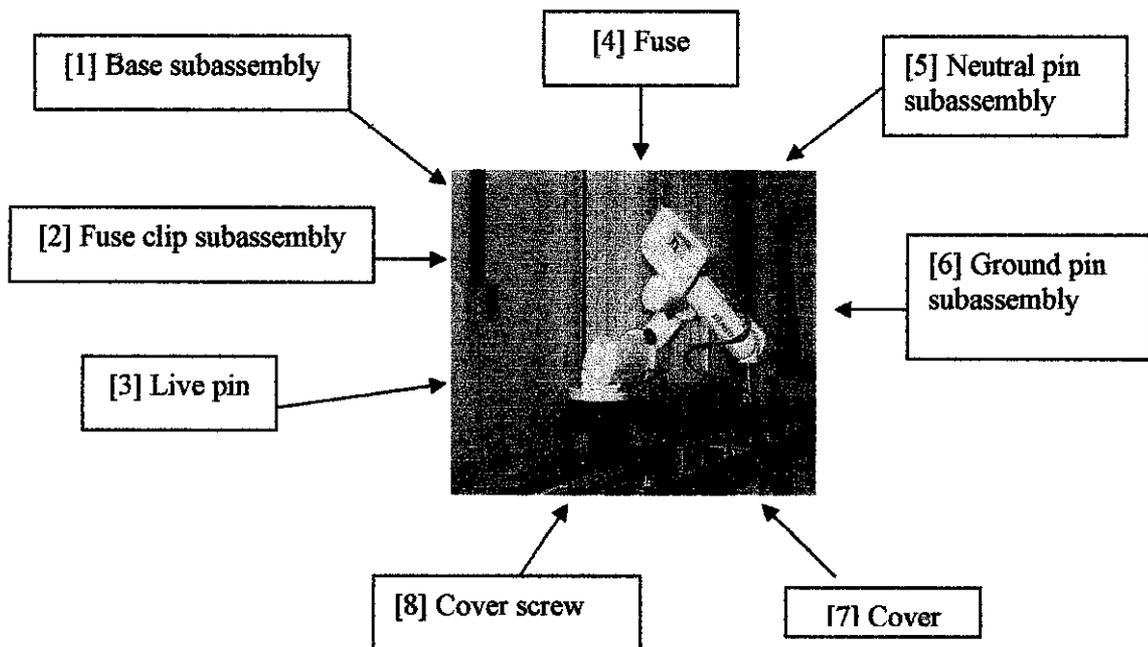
Single station One-arm robot assembly for 3 pin power plugs
